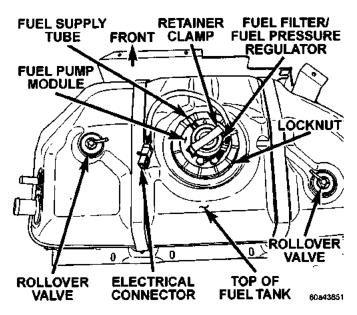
Fuel Tank/Fuel Pump Module (Top View)
